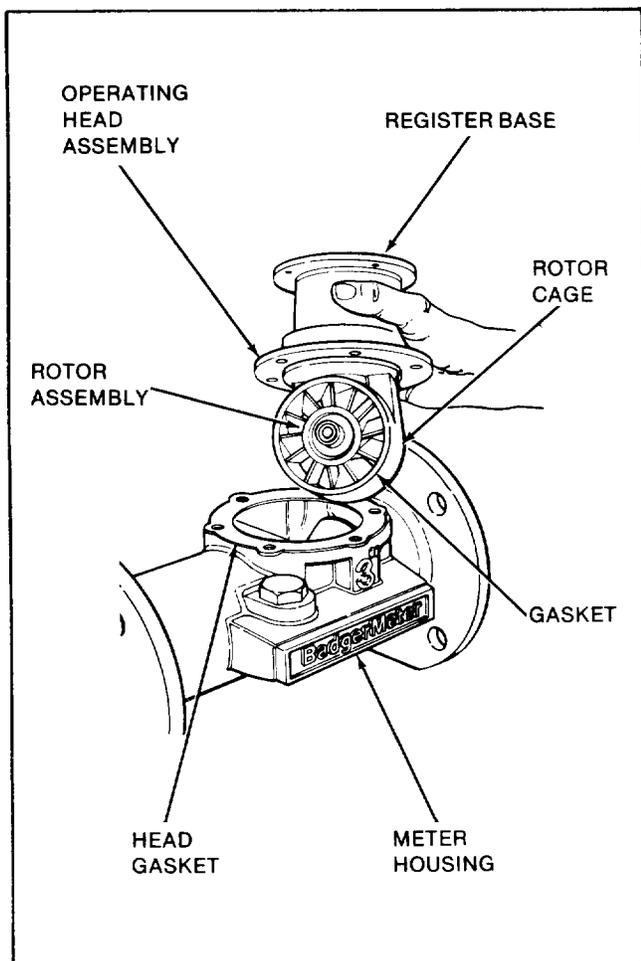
Turbo Meters Serviced Without Removal from the Line
